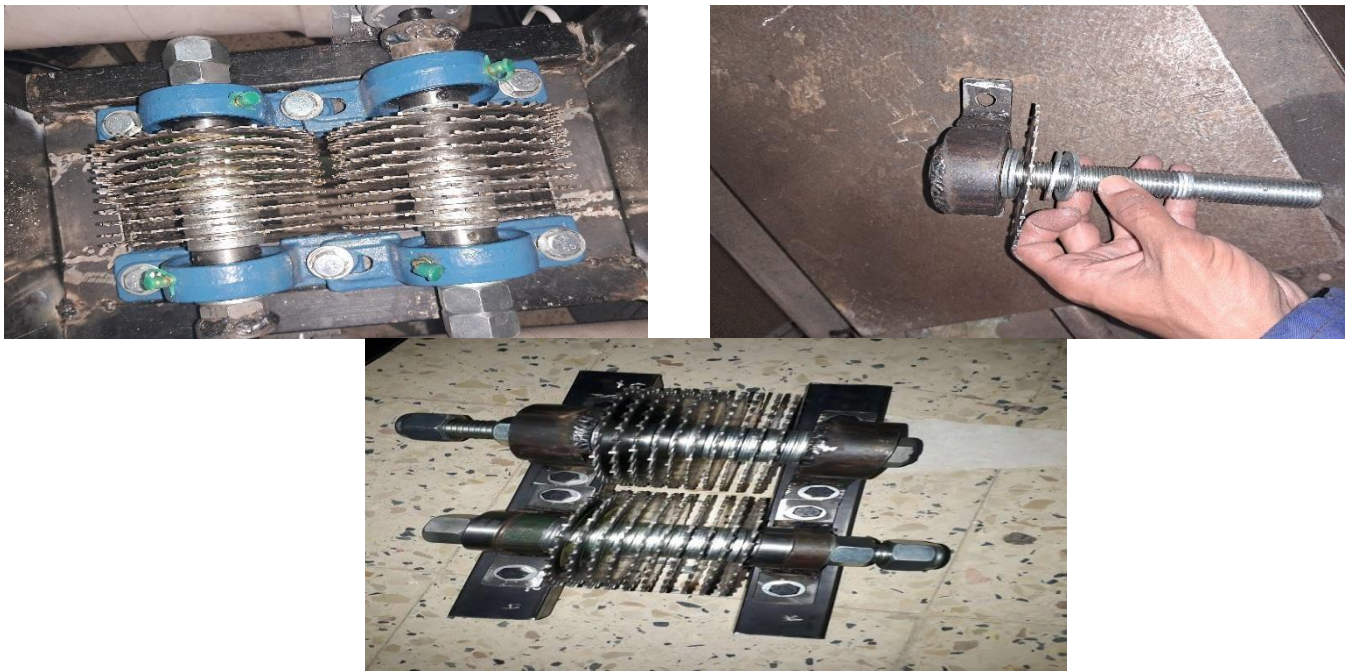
instal(the bar on th bearing ,the disks in the bar)the machine in the support
